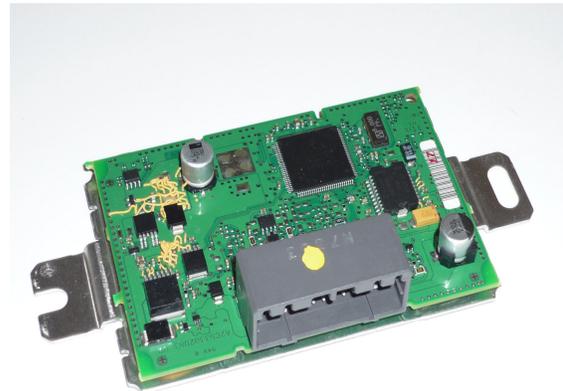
Continental Transfer Case Controller Module PC Board Attached to Aluminum Metal Back Plane
